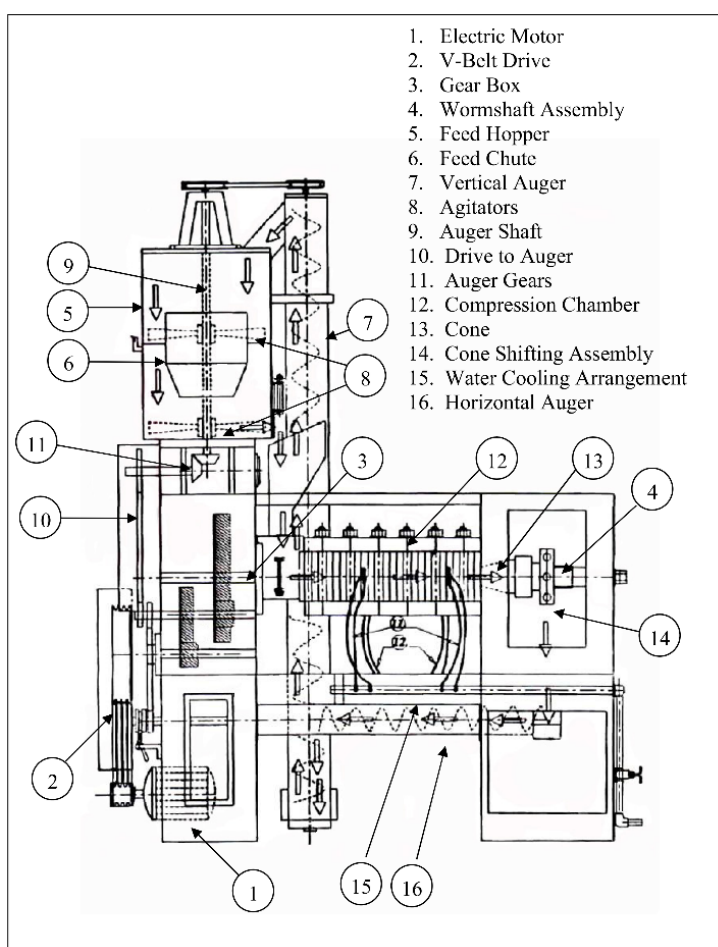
Technical details of 1 TPD MERADO make oil expeller
